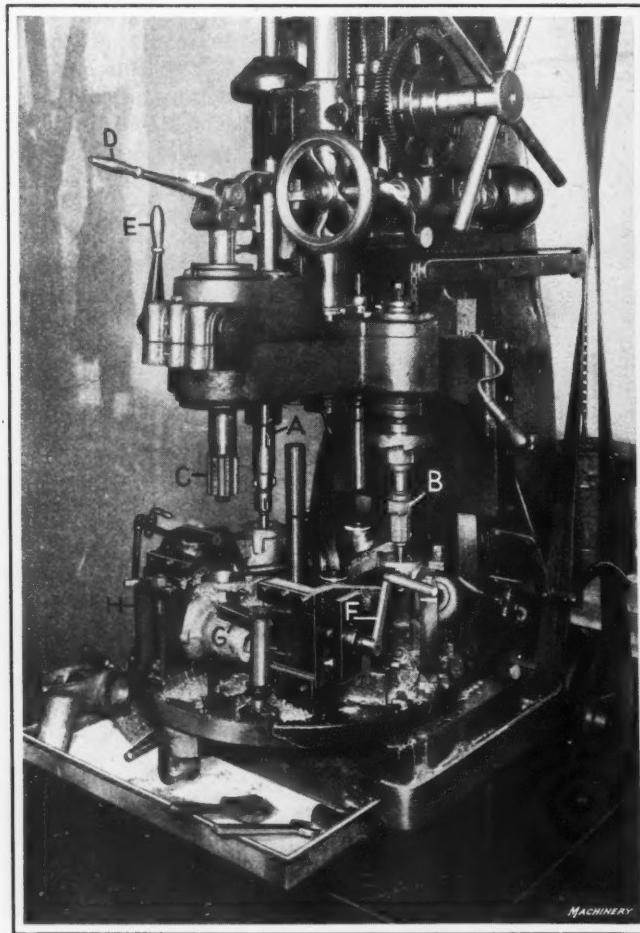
Baker Bros. High-duty Drilling Machine with Indexing Fixture and Three-spindle Head for boring and reaming Three Holes, facing Two Surfaces and tapping One Hole
